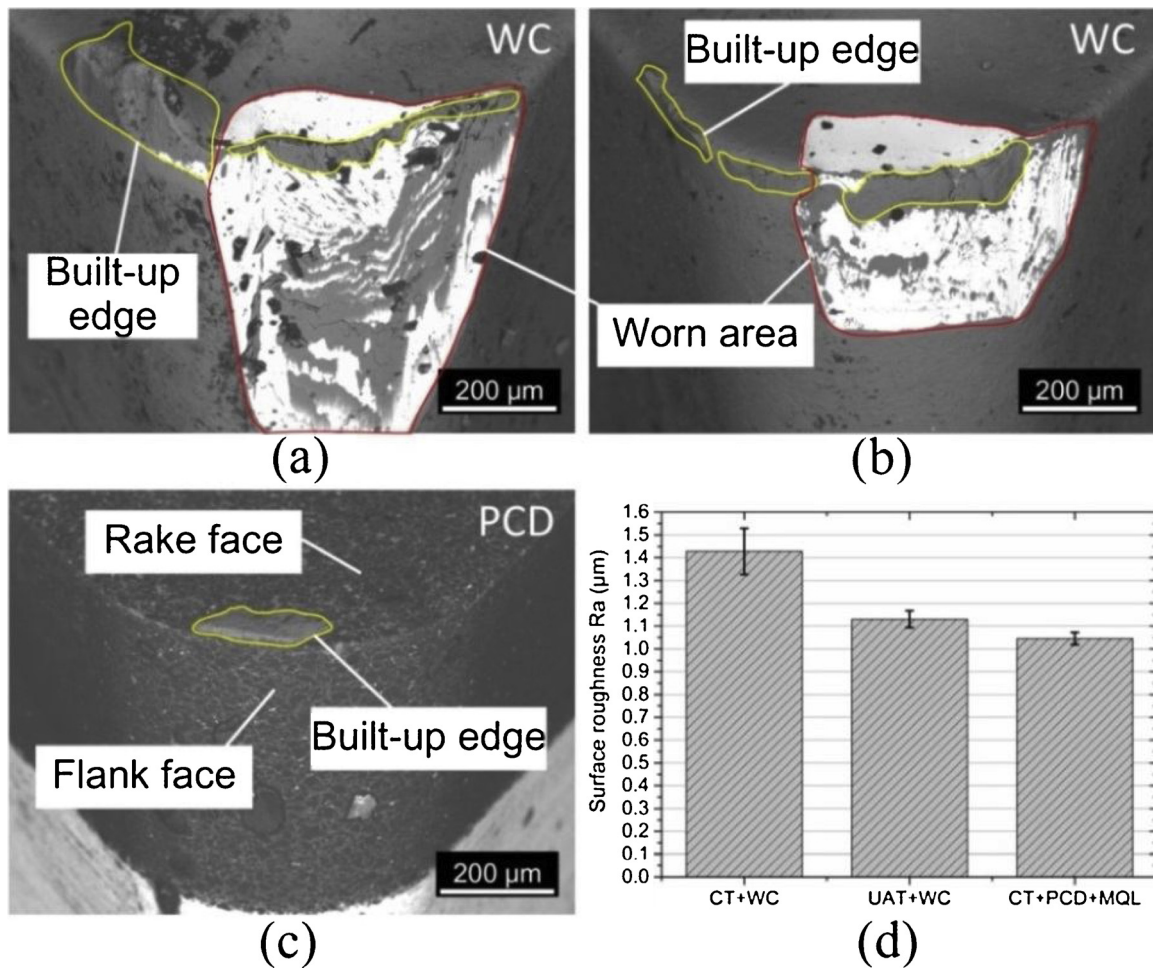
Final wear stage of cutting tools: (a) CT with WC tool; (b) UAT with WC tool; (c) CT with PCD tool and MQL. (d) Final surface roughness of machined surface.
